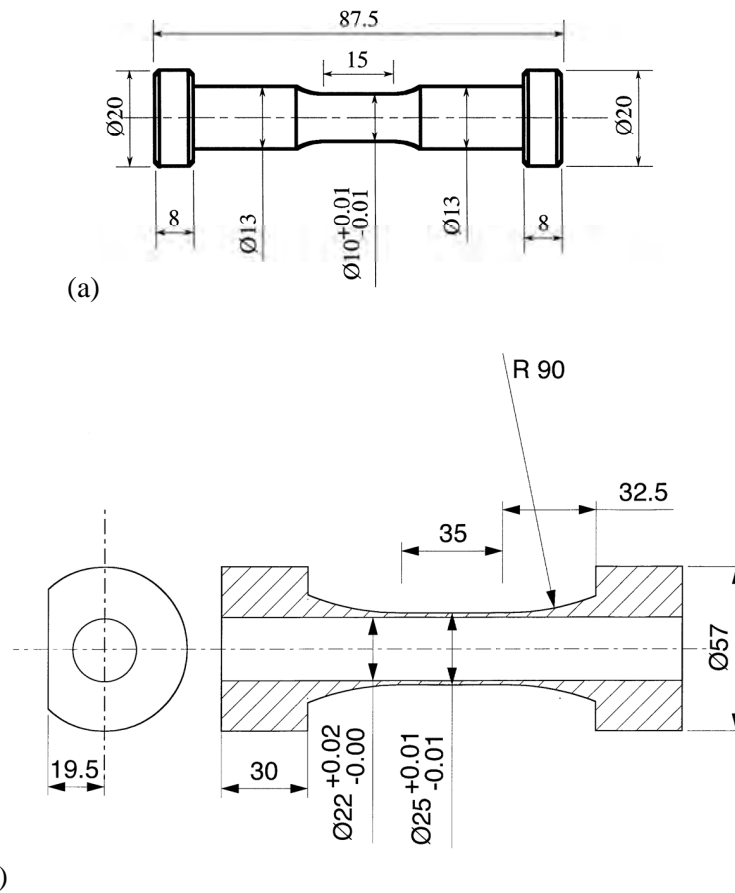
Geometries of the test specimens: a) tension/compression test specimens; b) tension/compression-torsion test specimens
